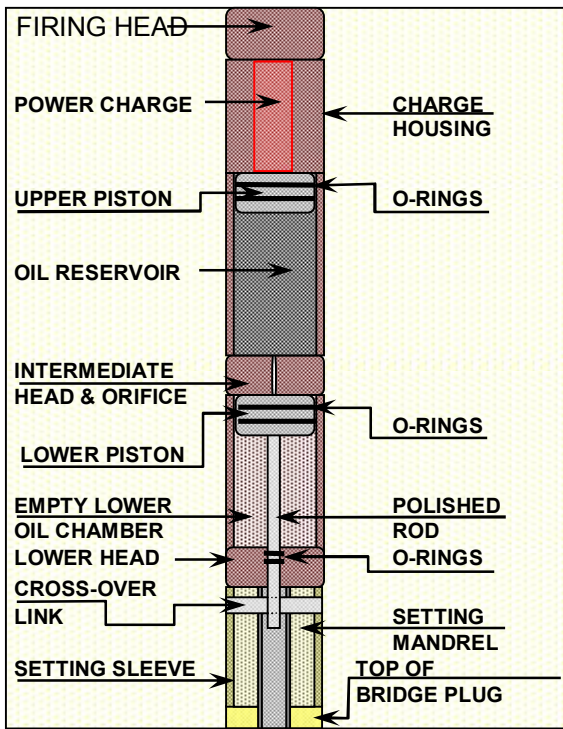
A drawing illustrating the mechanics of the Baker Setting Tool.
